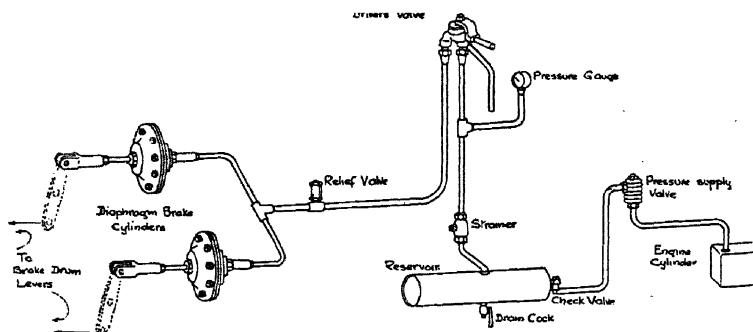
Westinghouse Pneumatic System for Automobile Braking.
